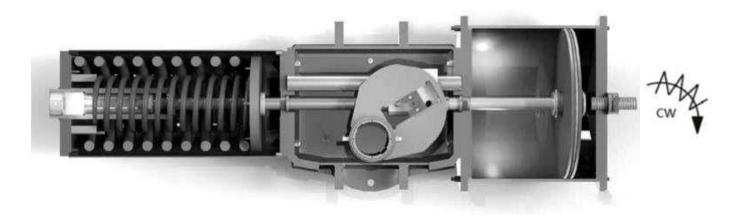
Single Acting Actuator Configuration: Fail Open – Fail Clockwise
